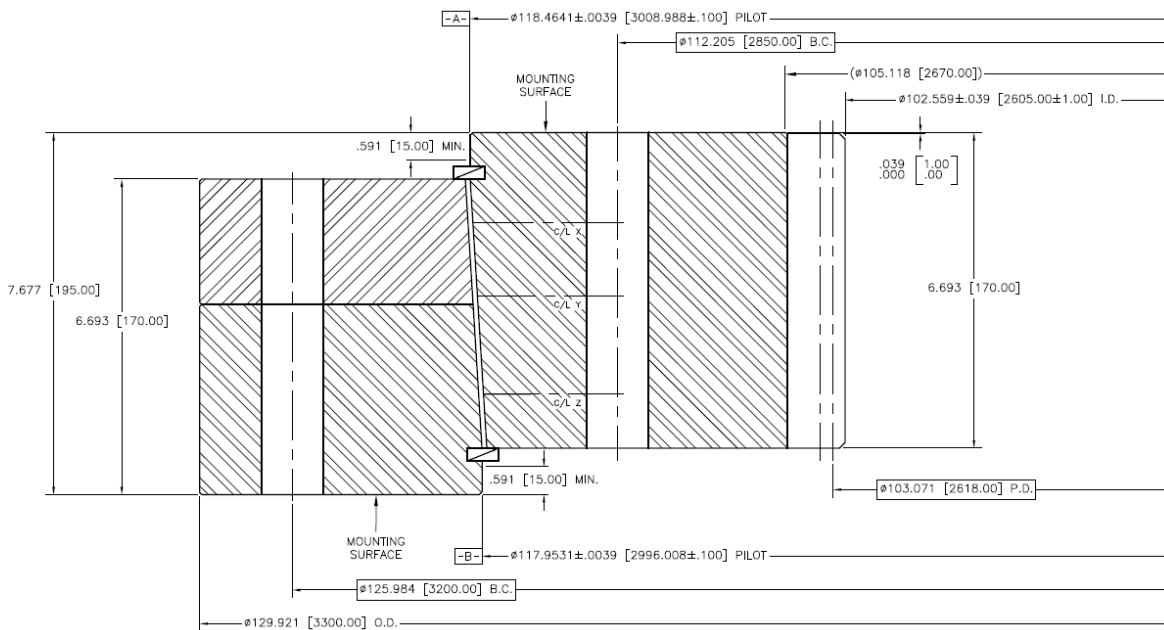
Three-Row-Roller Bearing (Sample, dimensions not applicable to ngVLA)
